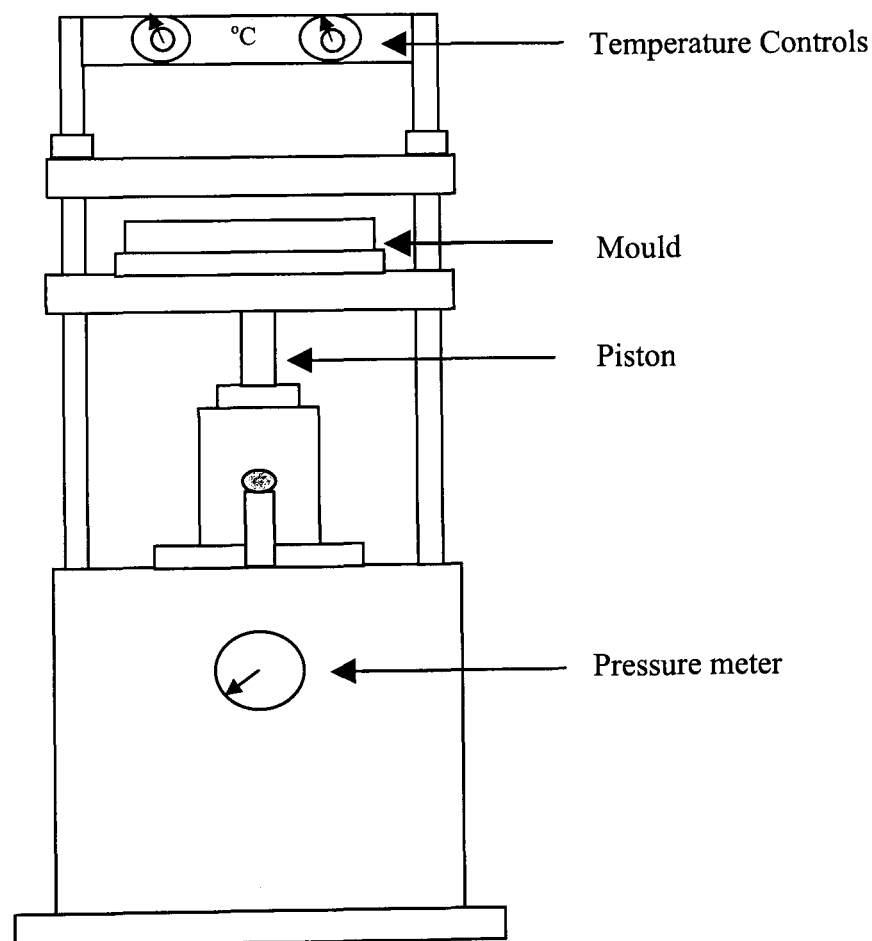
Hydraulic press used for the manufacture of plain composites and the fibre-metal laminates.
